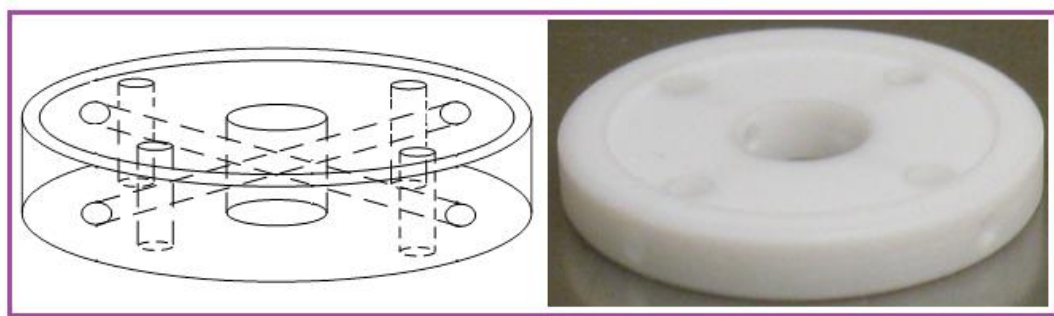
Schematic representation and fabricated construct holder with interconnected channels.
